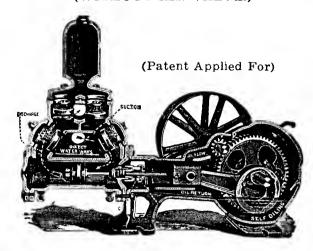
illustrate the Myers Self-Lubricating Pump Jack, engine driven, a novel device in which all gears and moving parts are enclosed in a one-piece casting, forming the Oil Reservoir. This construction not only insures perfect and continuous lubrication, but protects the moving parts from dust and dirt, greatly increasing the life of the Jack. Furthermore, it guarantees perfect safety.
